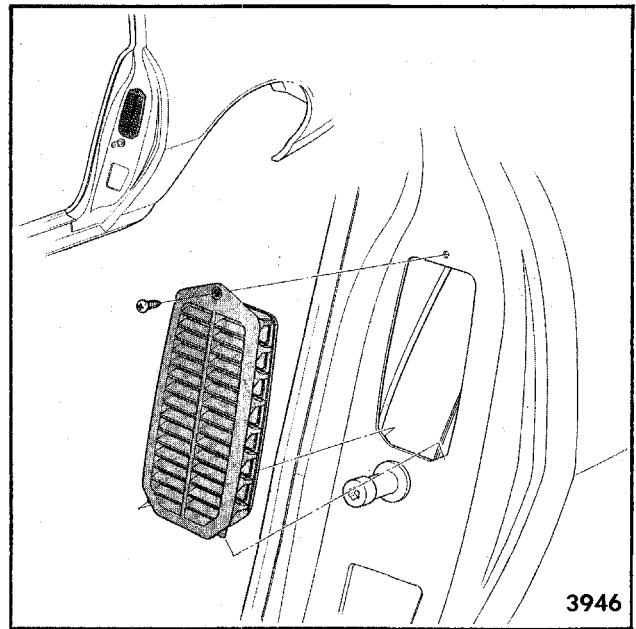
Pressure Relief Valve - "F" Styles ("H-11,27, 77" Styles Similar)
